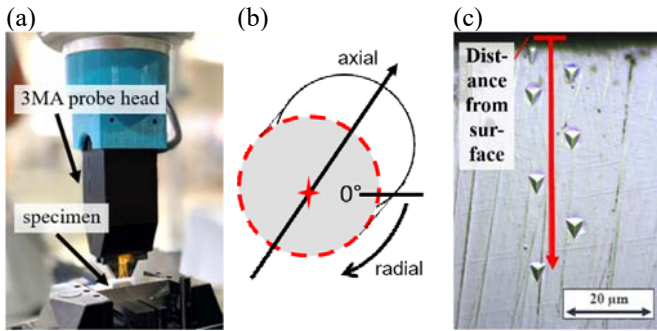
Experimental setup of (a) 3MA probe head in bulk material position; (b) scheme of the initial specimen for 3MA radial measurements; (c) depth indentation testing on cross section of specimen with thick WL formation.
